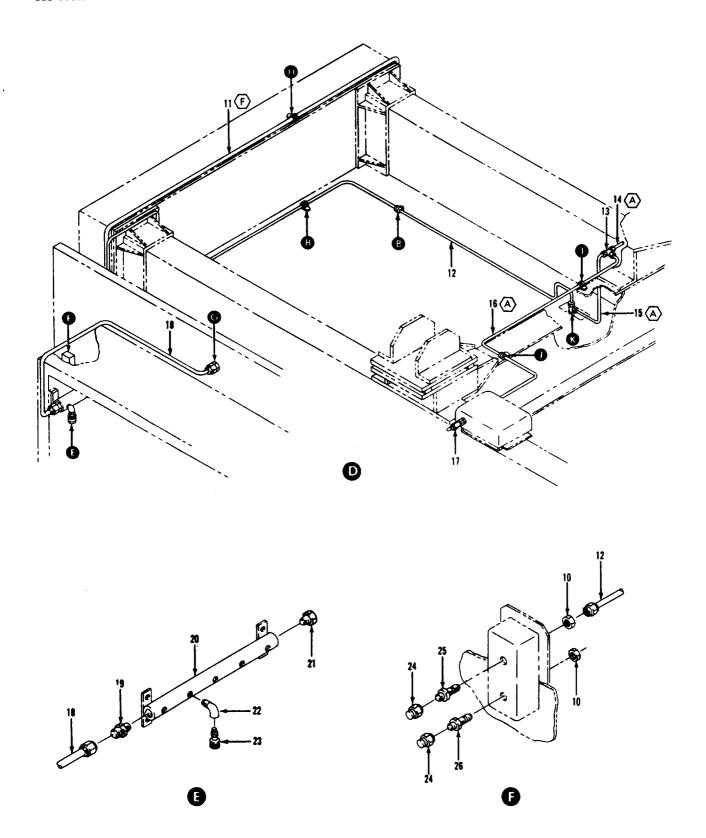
Tubing Installation (Sheet 3 of 17)
